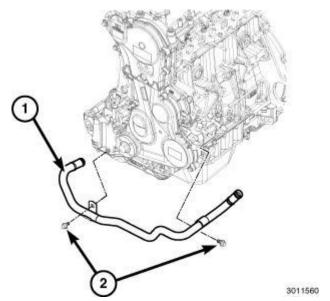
Coolant Tube & Bolts Courtesy of CHRYSLER LLC
